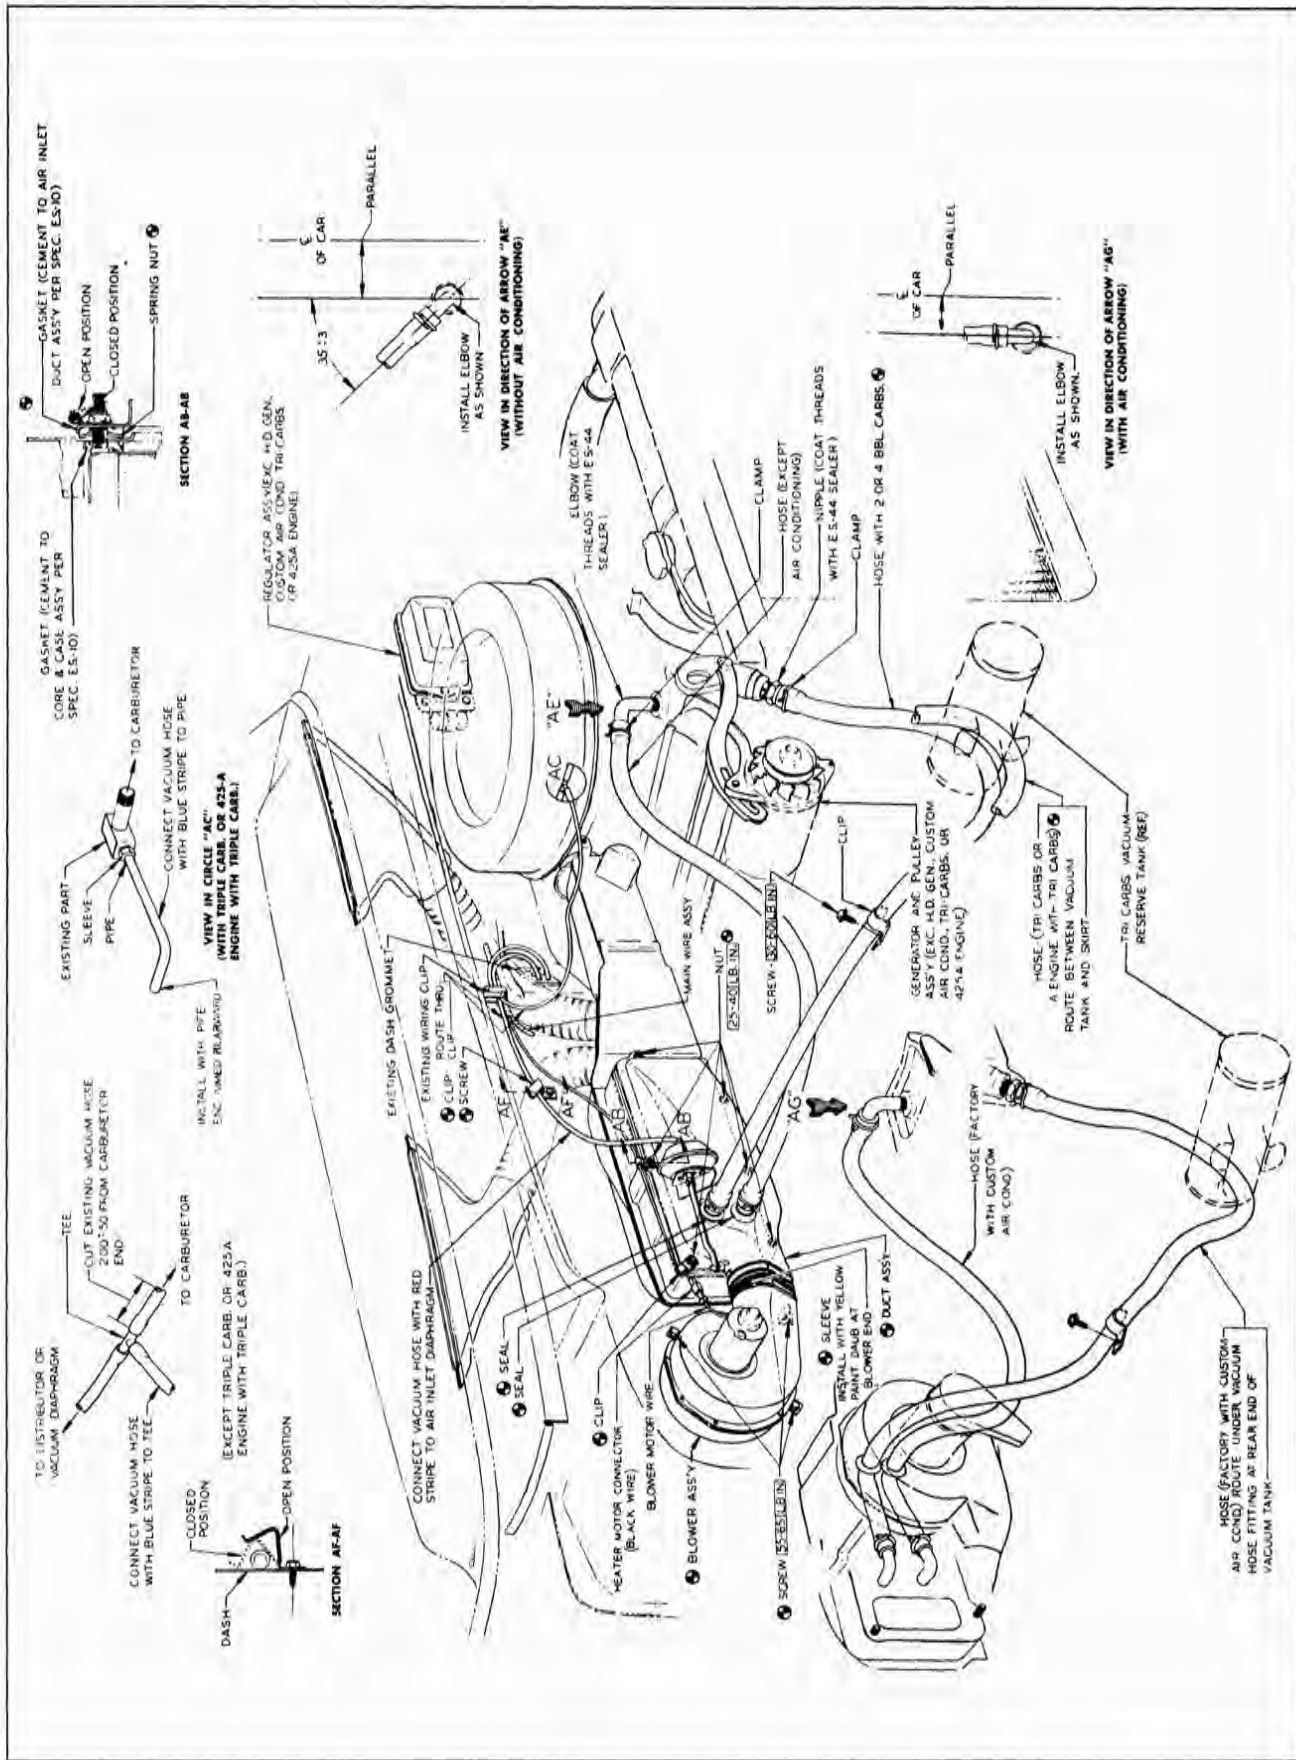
Reference Illustration—Circ-L-Aire Heater Parts in Engine Compartment
